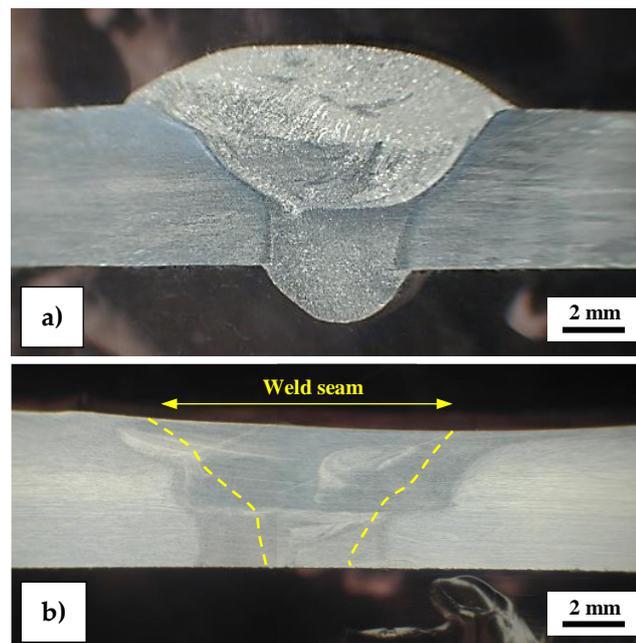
Cross-sectional macrographs of the samples; a) GTAWed sample, b) GTAWed+FSPed sample
